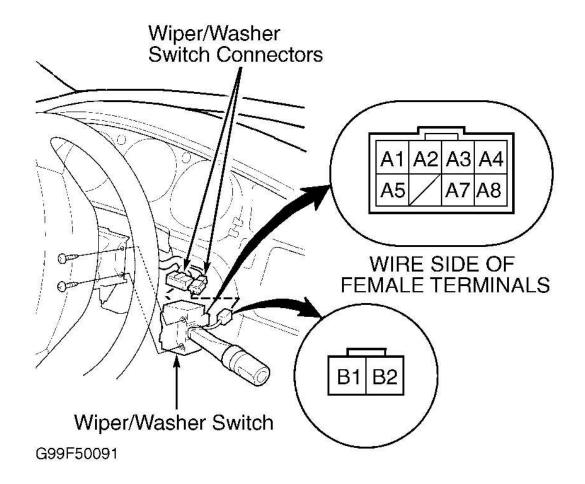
Identifying Windshield Wiper/Washer Switch Terminals (3.5RL Shown; 3.2TL Is Similar) Courtesy of AMERICAN HONDA MOTOR CO., INC.
